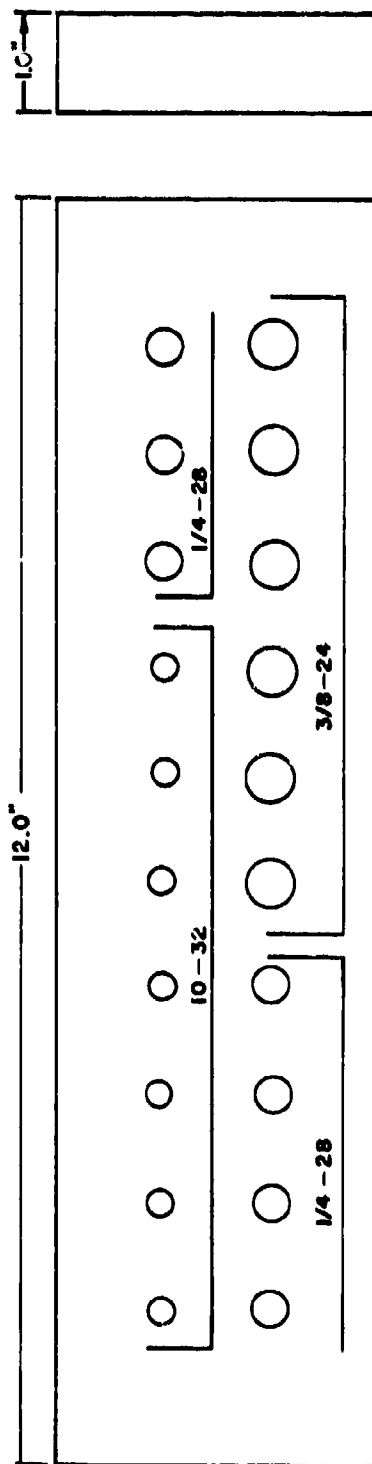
Locking & Unlocking Torque Specimen Lay Out
